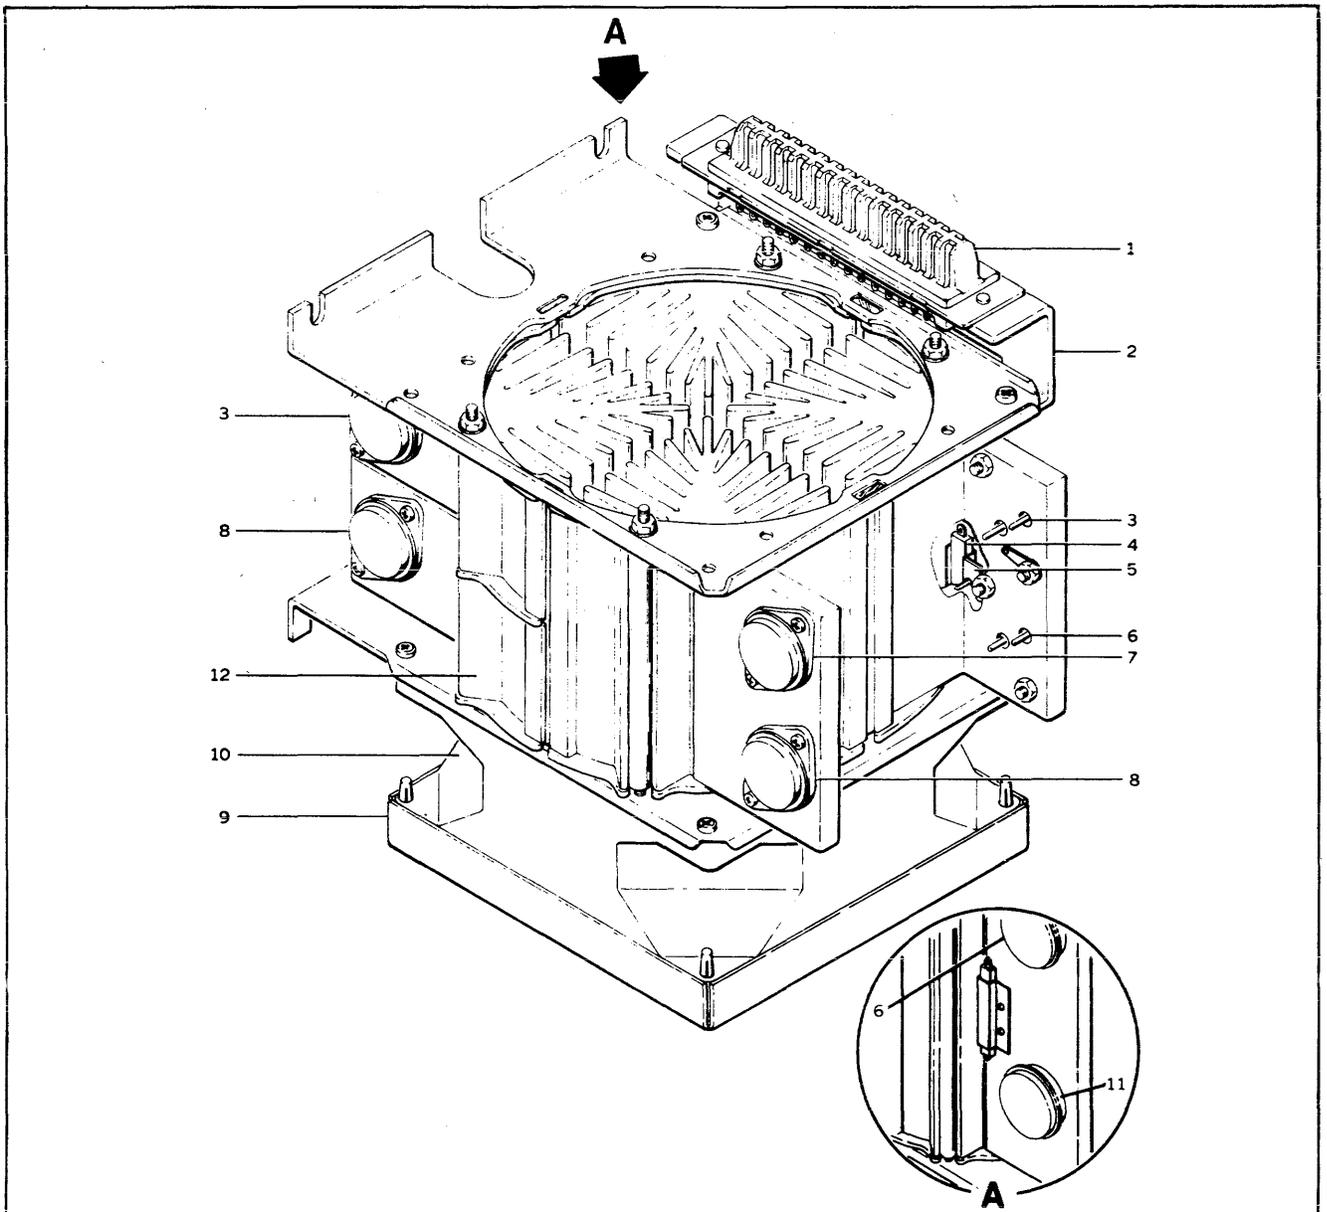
A311 Transformer Assembly, Parts Identification Diagram
